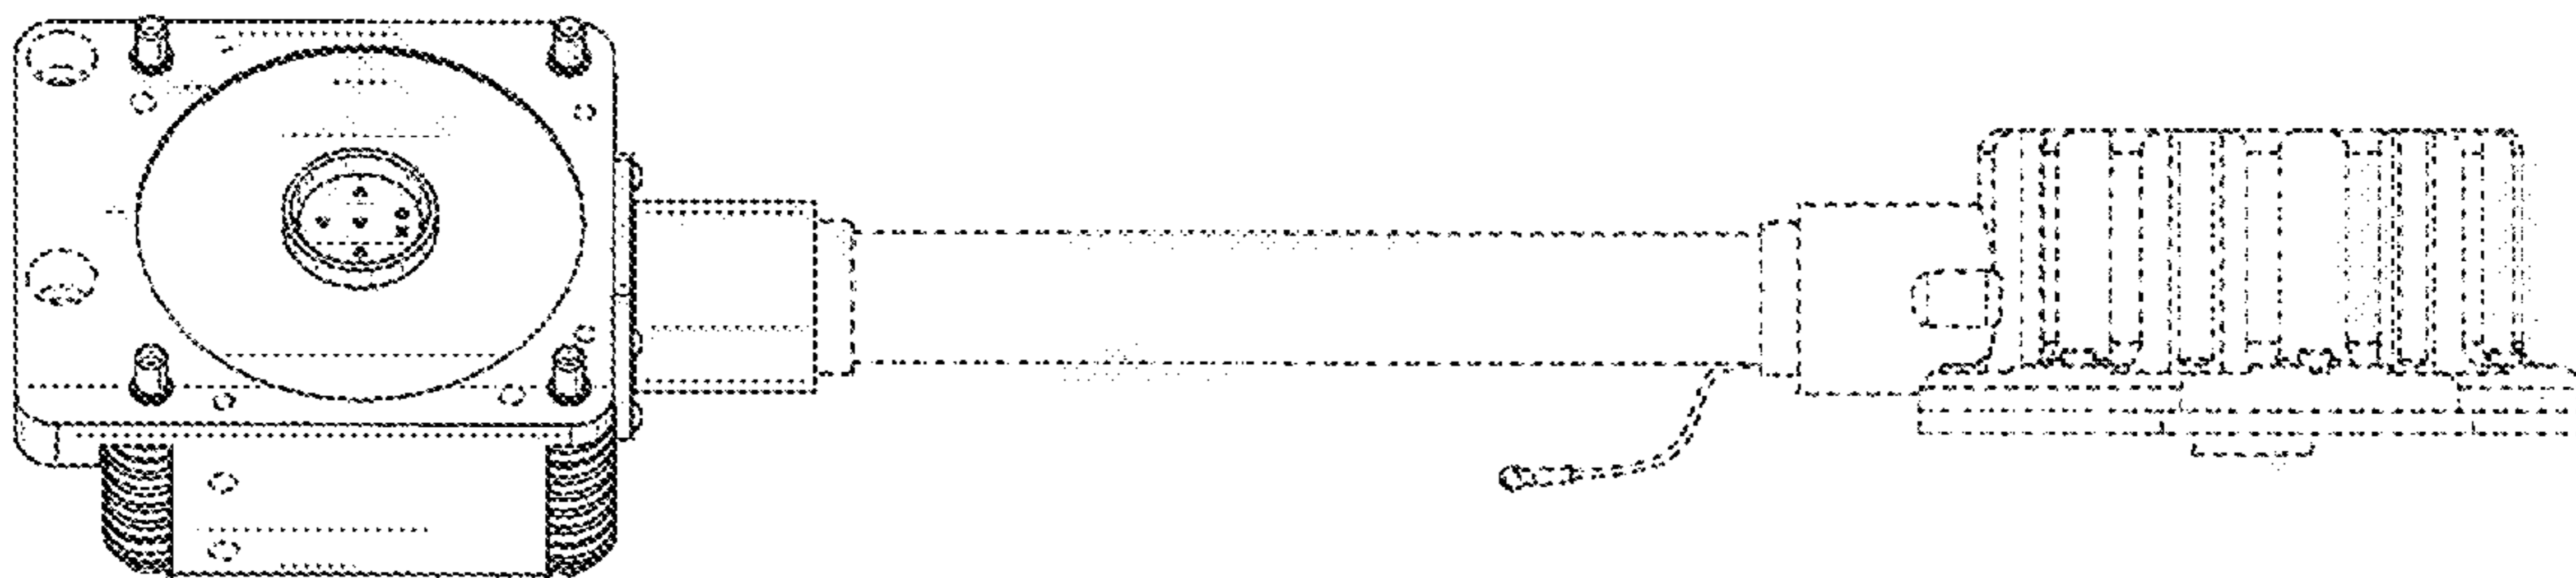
is a rear bottom perspective view of the connector for a medical imaging device.
